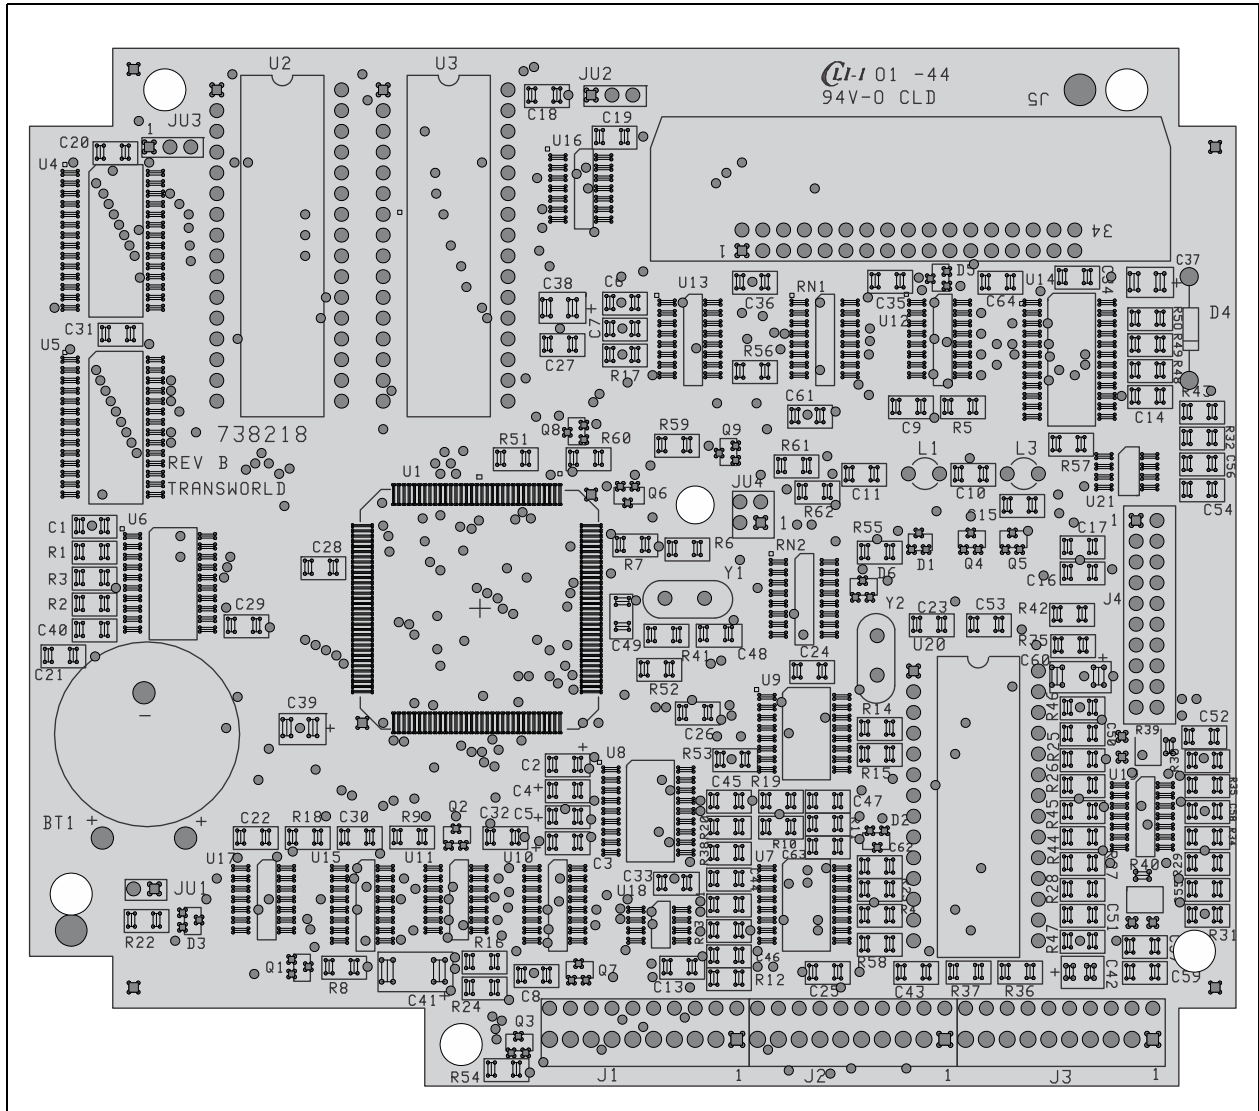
Processor Board Component Locations (738218 Rev. B)
